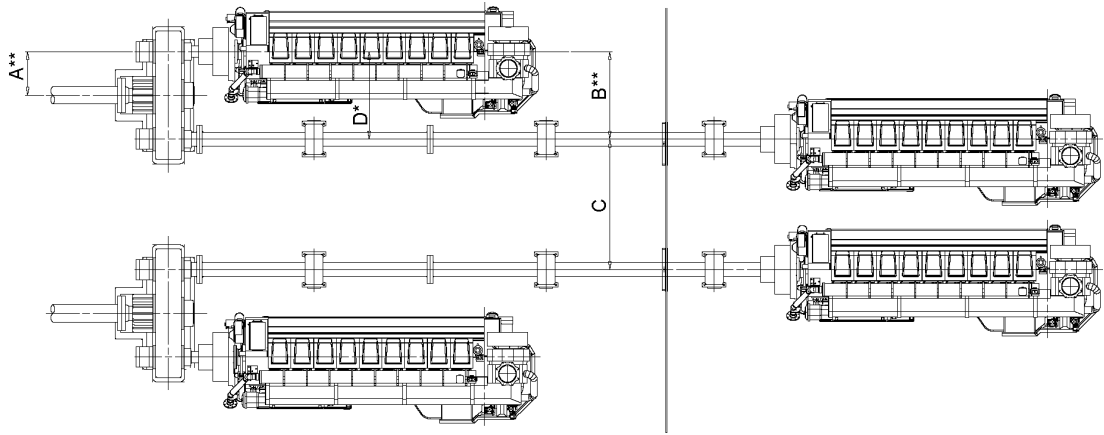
Main engine arrangement, in-line engines (DAAE086973B)
